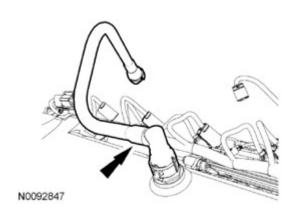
Locating Crankcase Ventilation Tube Courtesy of FORD MOTOR CO.
